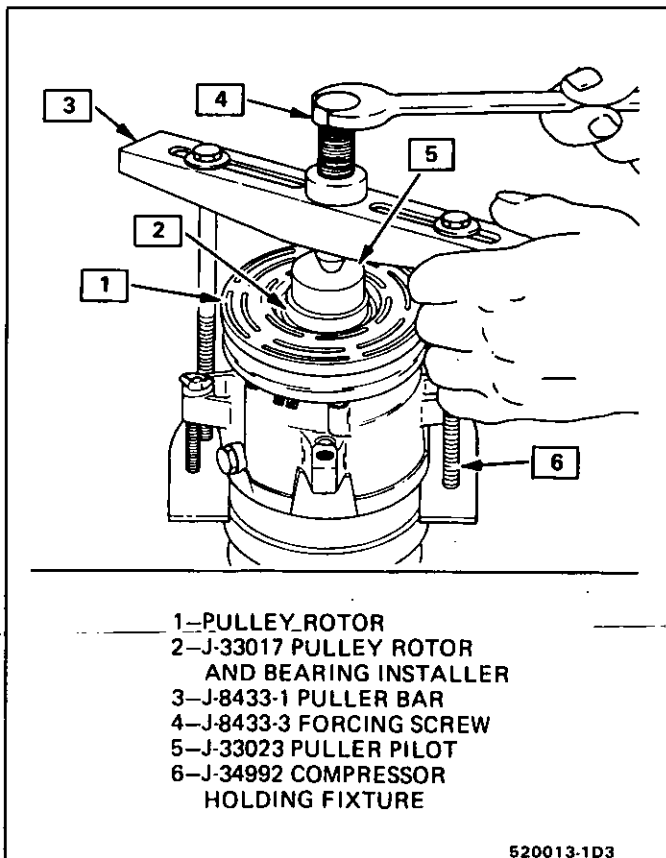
Installing Pulley Rotor and Bearing Assembly
